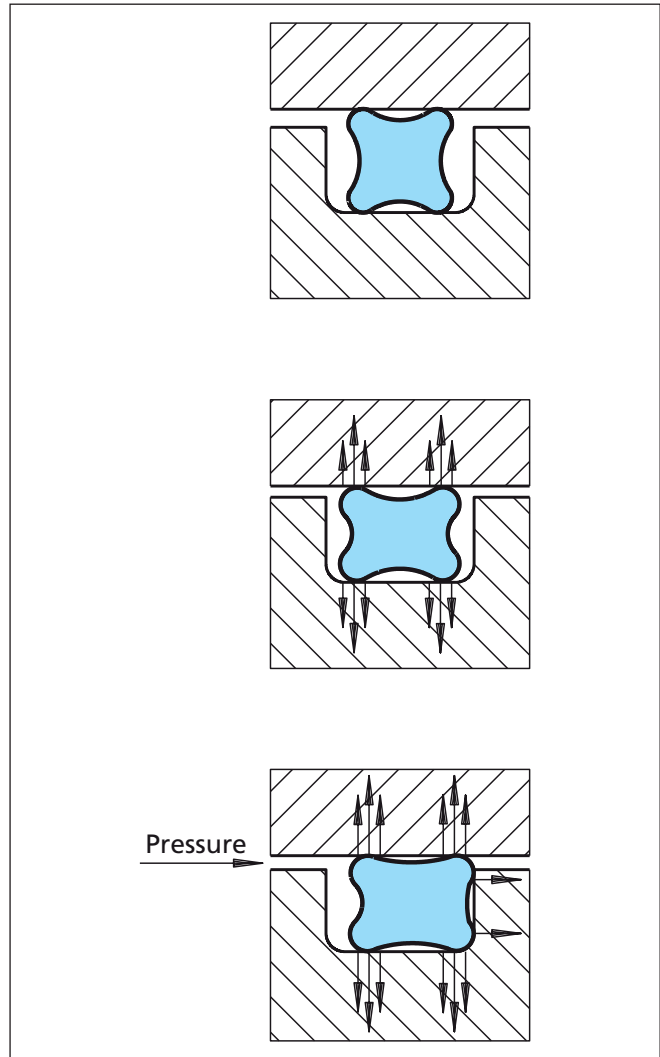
Quad-Ring® Seal squeeze with and without system pressure
